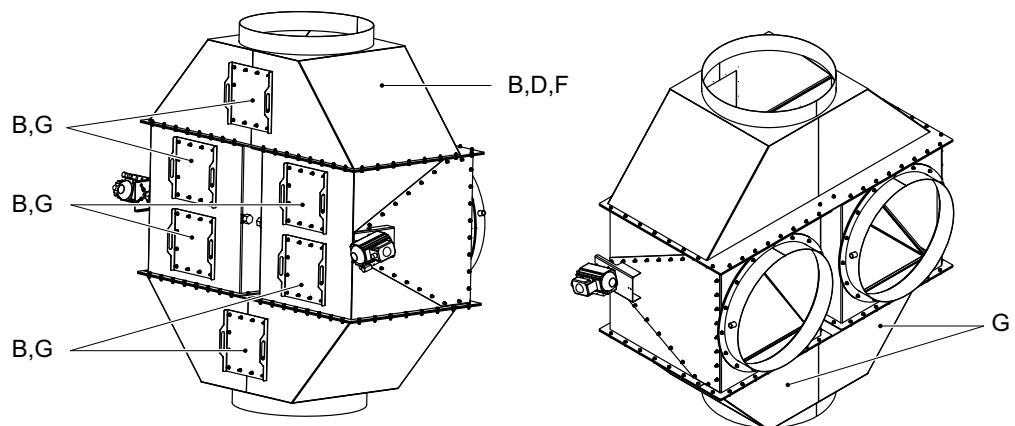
Warning instructions, symbols and labelling at the bypass flap
